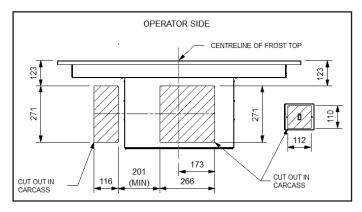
Diagram showing the cut out position for the fitting of the switch box and the air inlet grill (GRL203CS) and air outlet grill (GRL204CS) on the operator side of the Frost top for rear venting.
